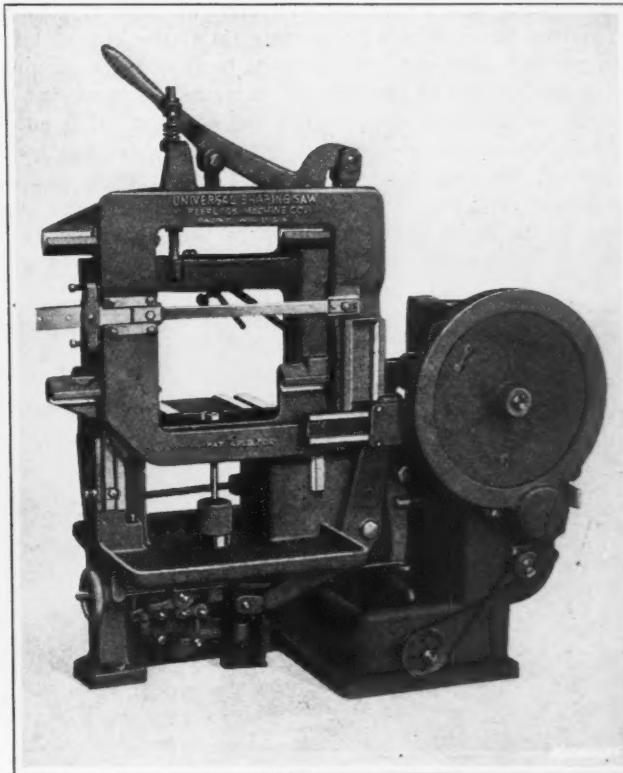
Side View, showing Mechanism for feeding Saw and lifting it on Return Stroke
